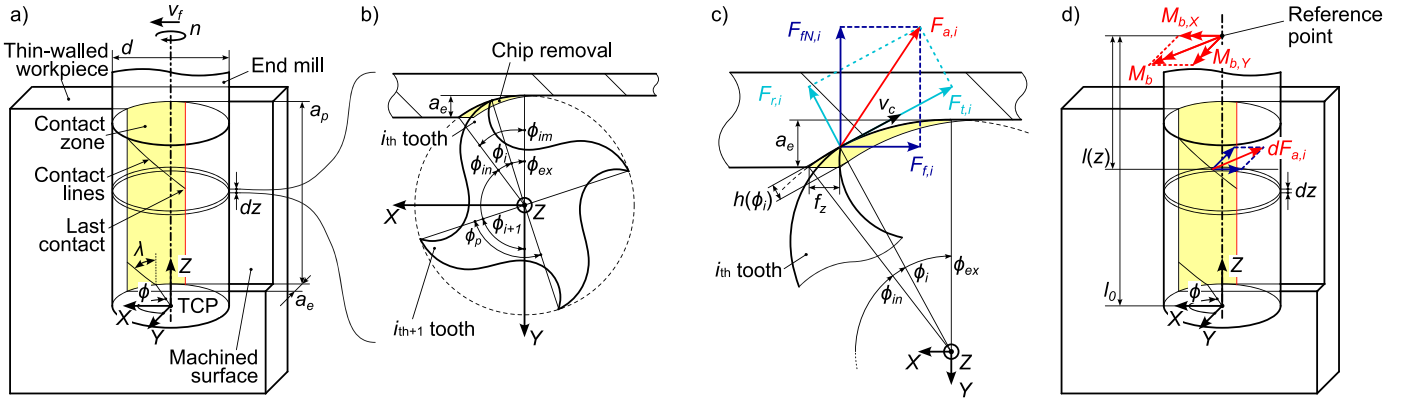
Modeling of the bending moment in circumferential milling: (a) Isometric view of the tool–workpiece interaction; (b) Cross-sectional view with angle notation; (c) View of an engaging tooth and the resulting process forces; (d) Illustration of the resulting bending moment.
